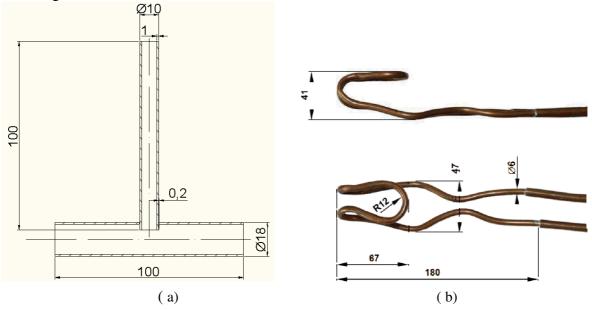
Dimensions of components a) brazed tubes, b) inductor
